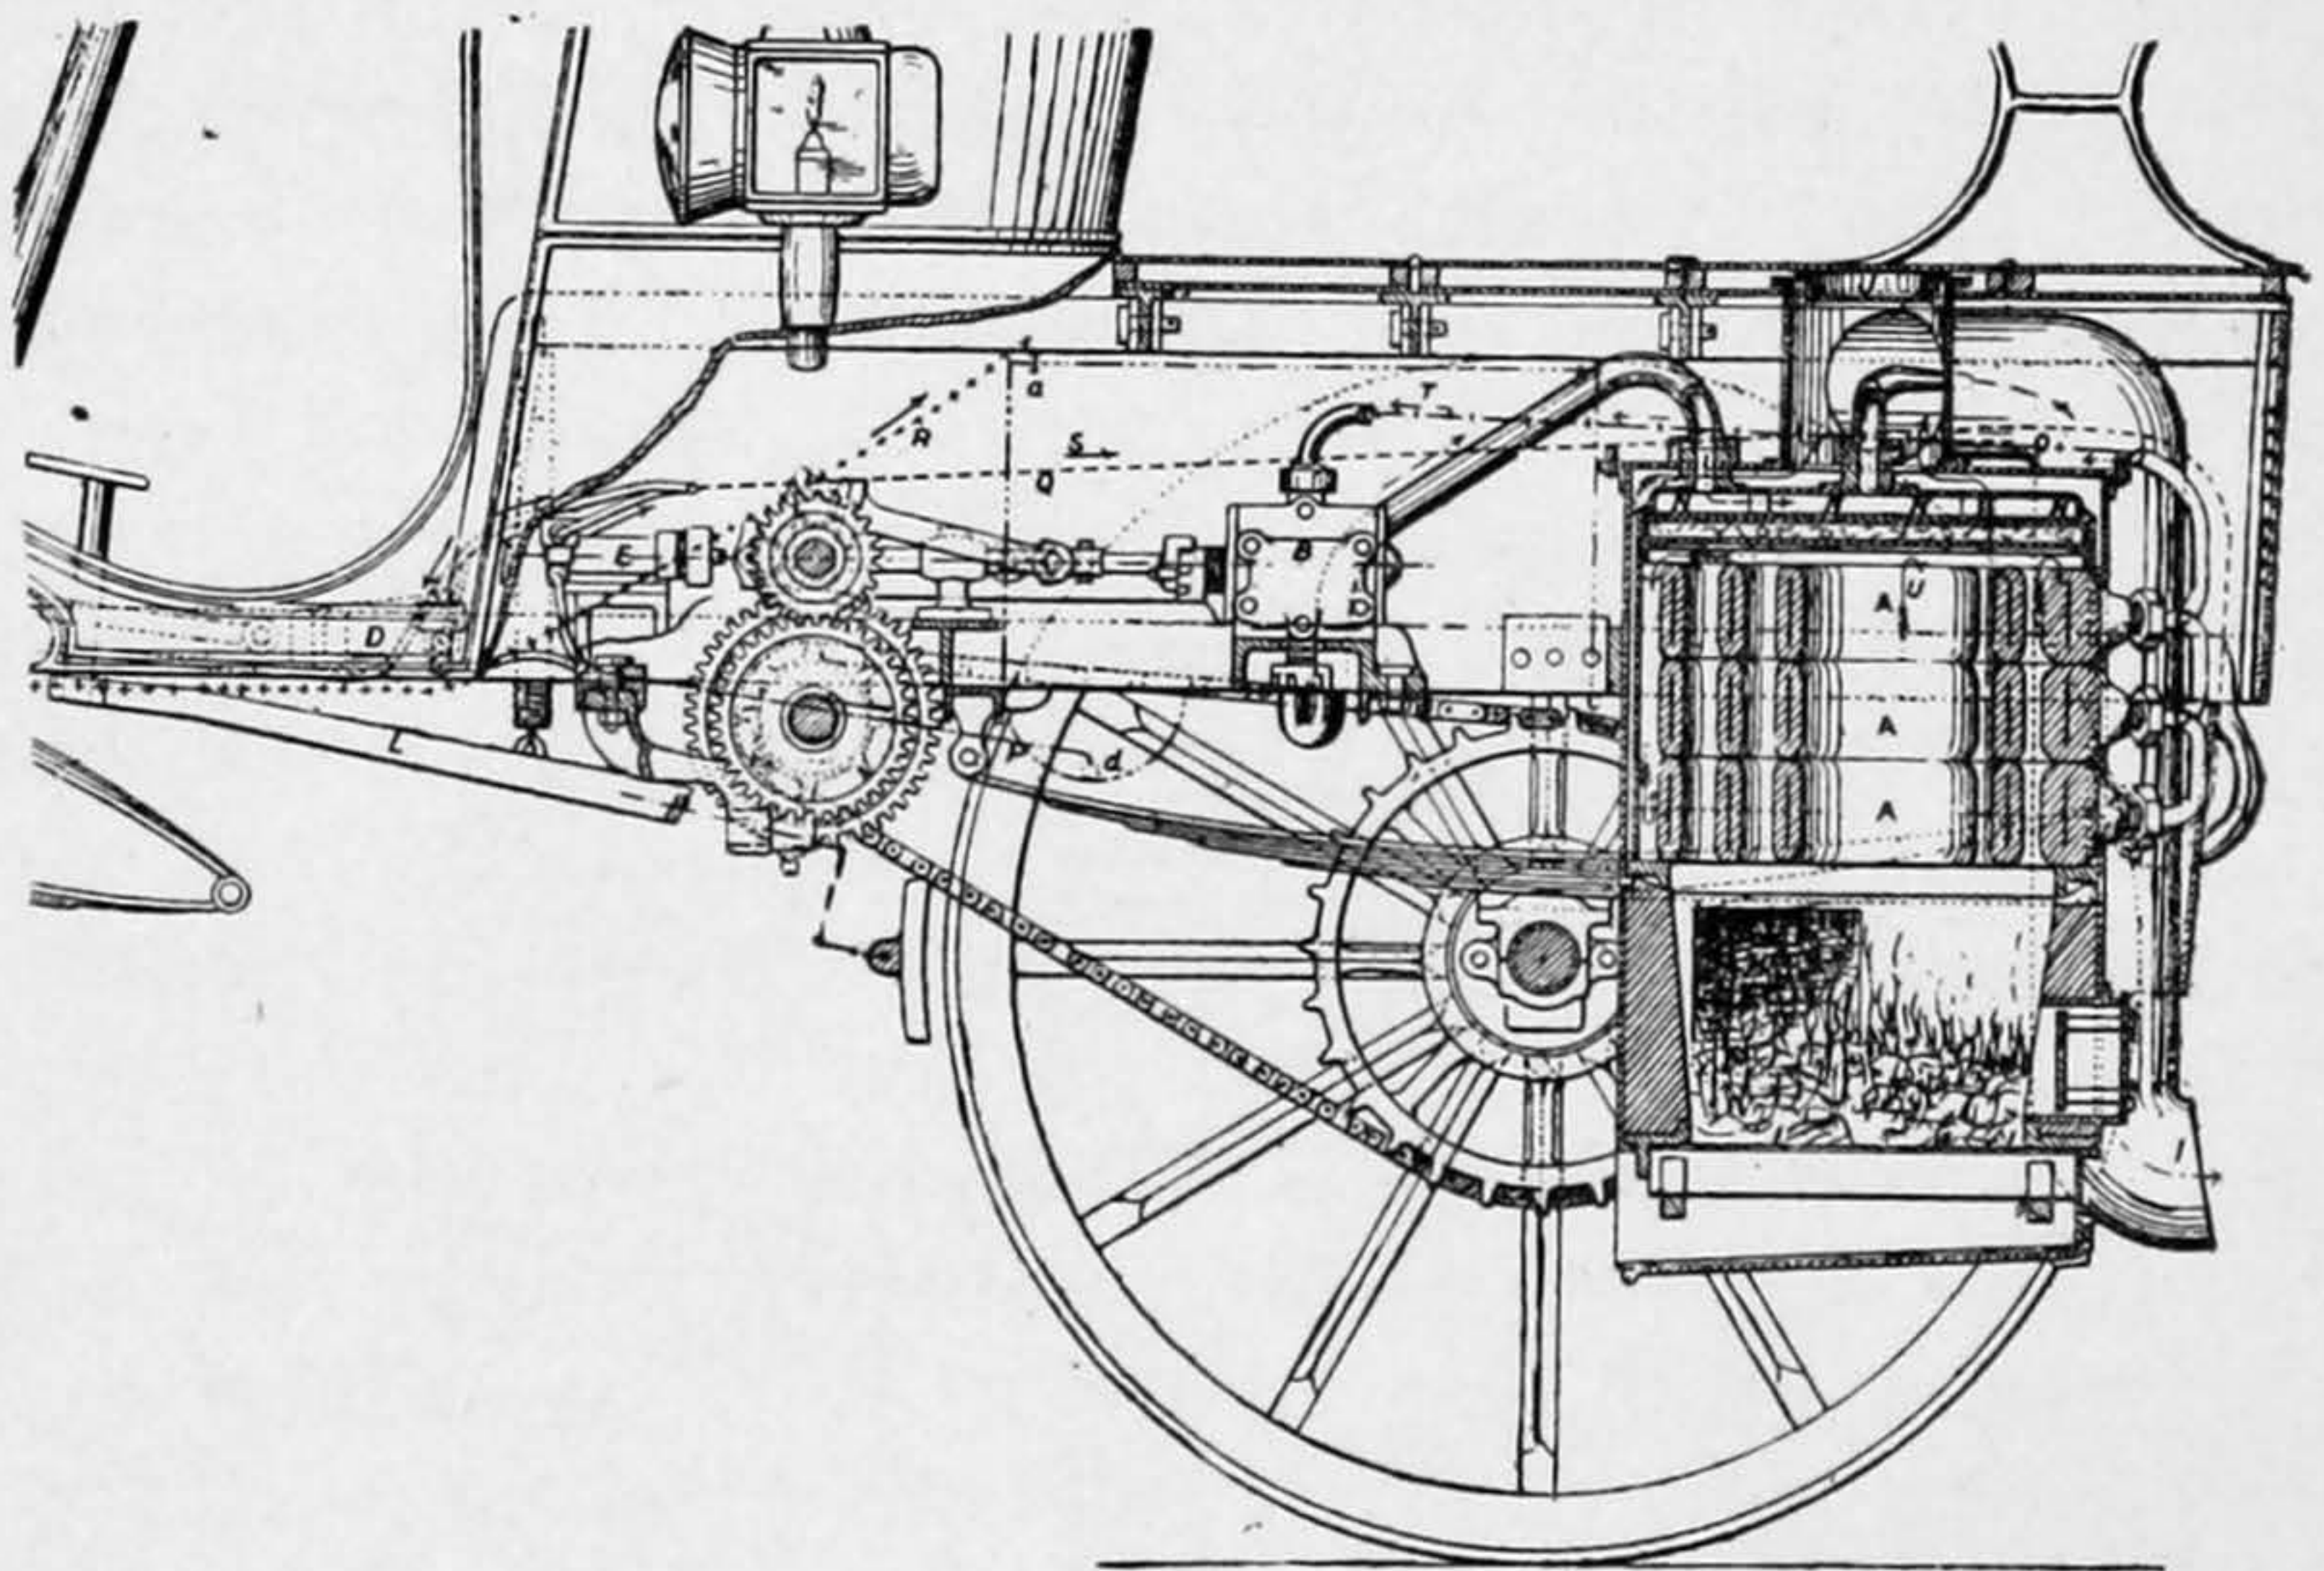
THE "SERPILLET" BOILER AND STEAM PHAETON ENGINE.
